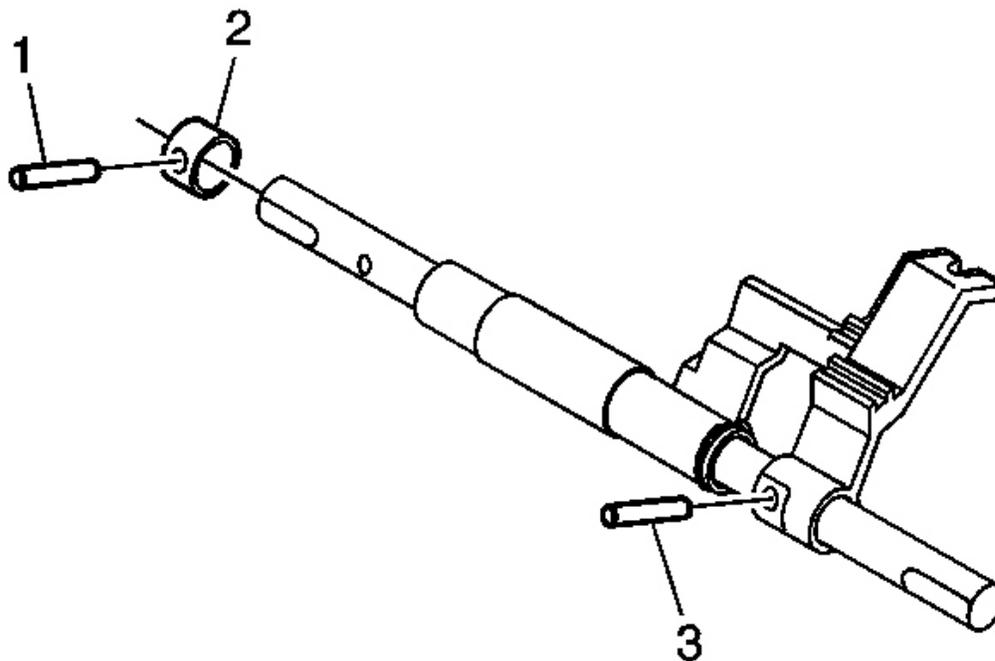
View Of Reverse Lever Roll Pin, Reverse Collar & Reverse Collar Roll Pin
